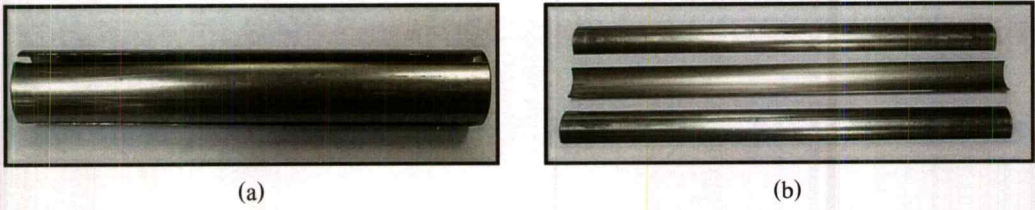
A typical tube cut in longitudinal direction, (a) a cut tube and (b) wall-separated tubes
